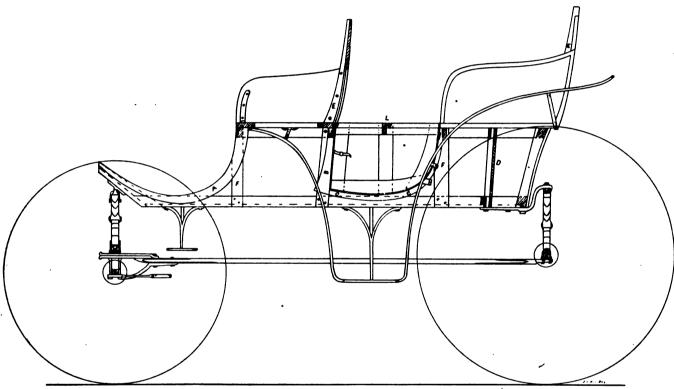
SHOWING SIDE ELEVATION OF STRAIGHT SILL SURRY.
